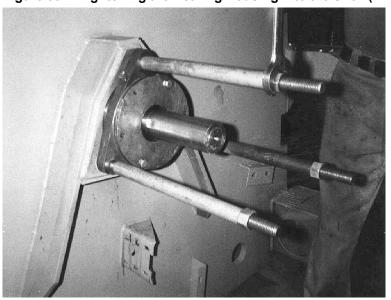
Pushing the Bearing Housing into the Shell (60" Rapid-load machine shown)
